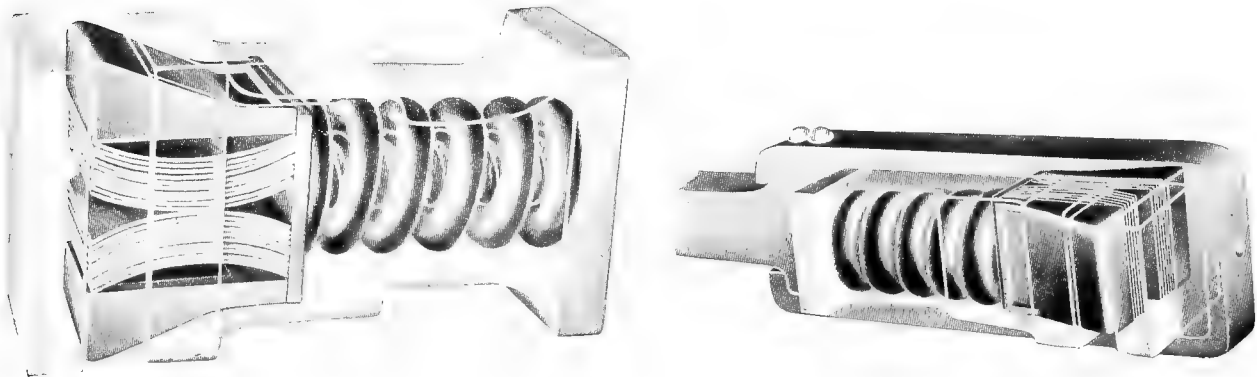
Gould Heavy Type Friction Draft Gear, No. 175. Gould Coupler Company.
